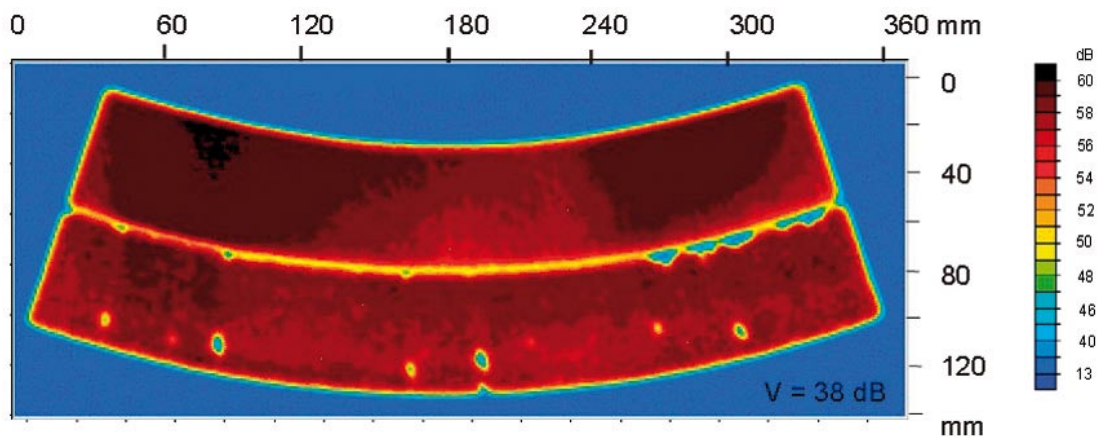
C-scan of an electron beam welded ring segment (circumferential position: 32–72°) when using pulse echo method in contact technique.
